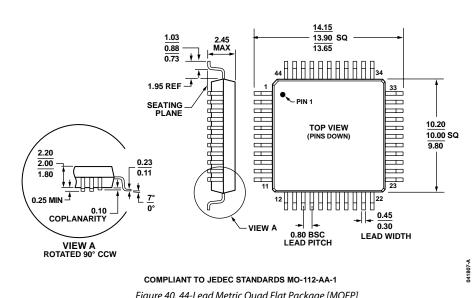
44-Lead Metric Quad Flat Package [MQFP] (S-44-2) Dimensions show in millimeters
